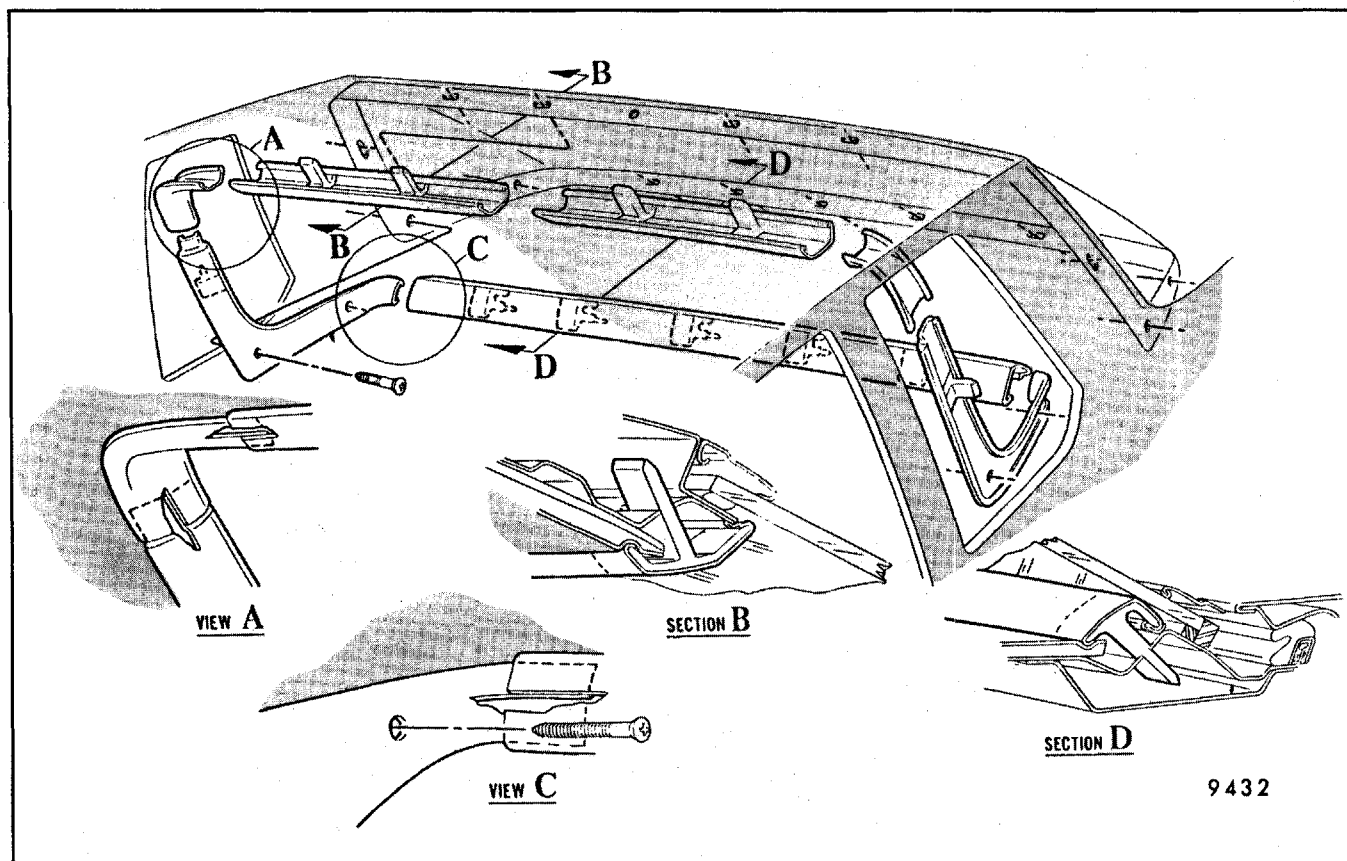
Back Window Garnish Moldings "B-37-69" Shown (Other Styles Similar)
